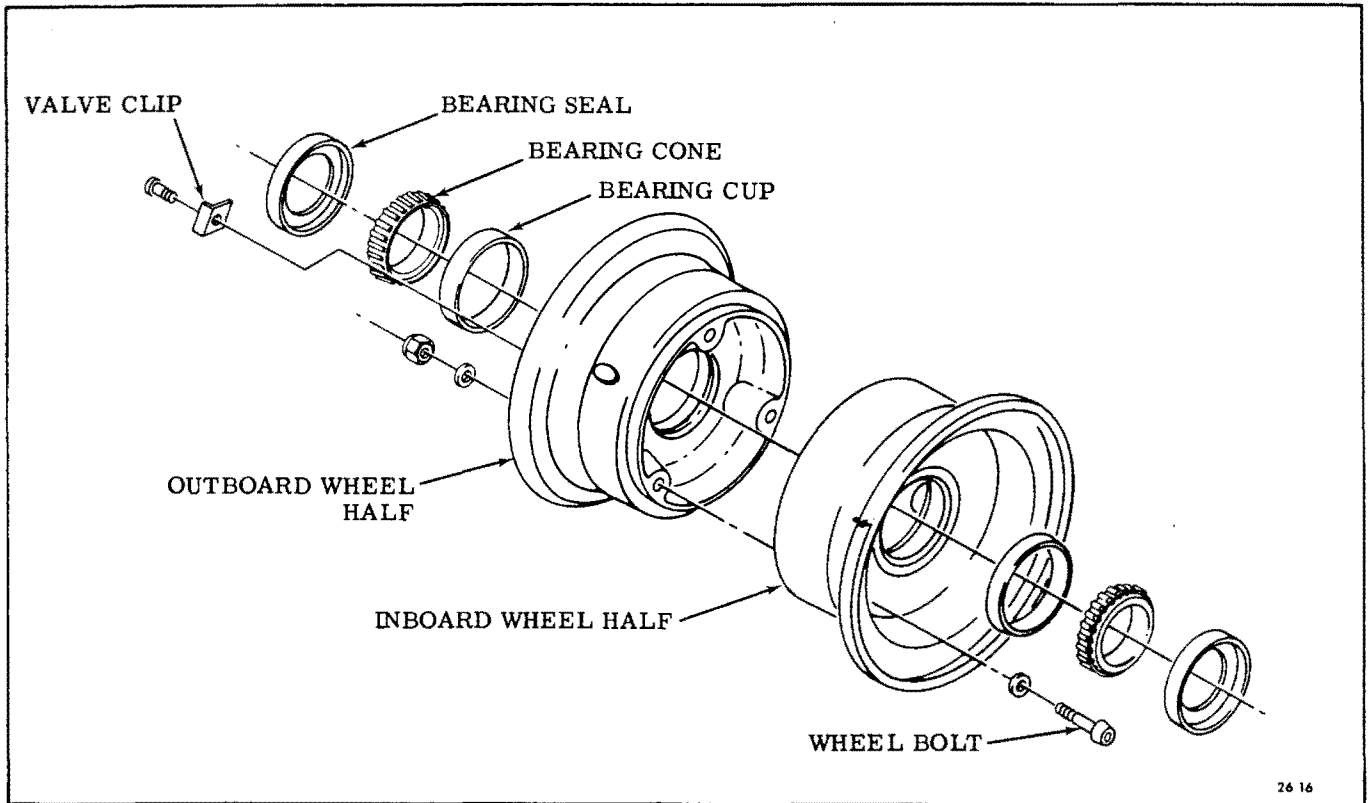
Nose Wheel Assembly (Aircraft 121 and Subs)
